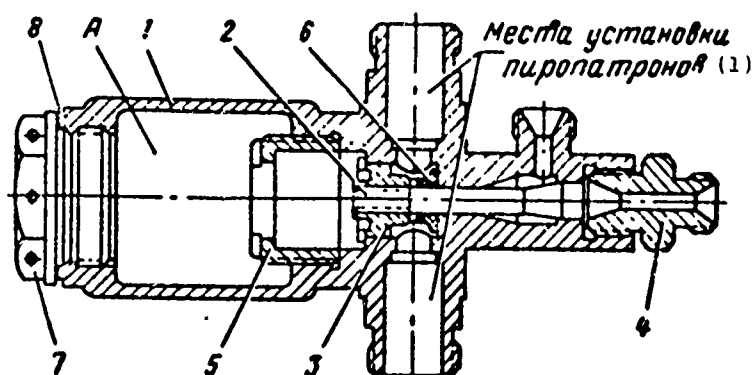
A normally closed explosive valve with isolation of the solid-reactant gases: 1 - housing; 2 - valve; 3 - piston; 4 - connector tube; 5 - detent; 6 - stop ring; 7 - plug; 8 - gasket; A - space for solid-reactant gases. KEY: (1) Site of placement of explosive cartridges.
